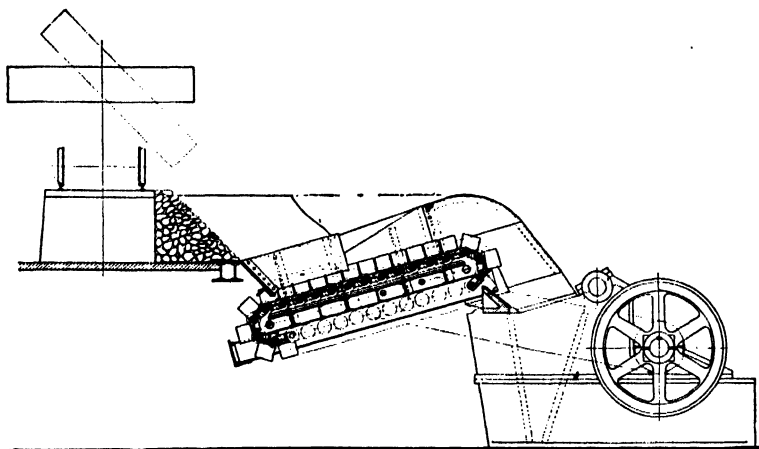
Apron-feed conveyor for Superior jaw crusher.
